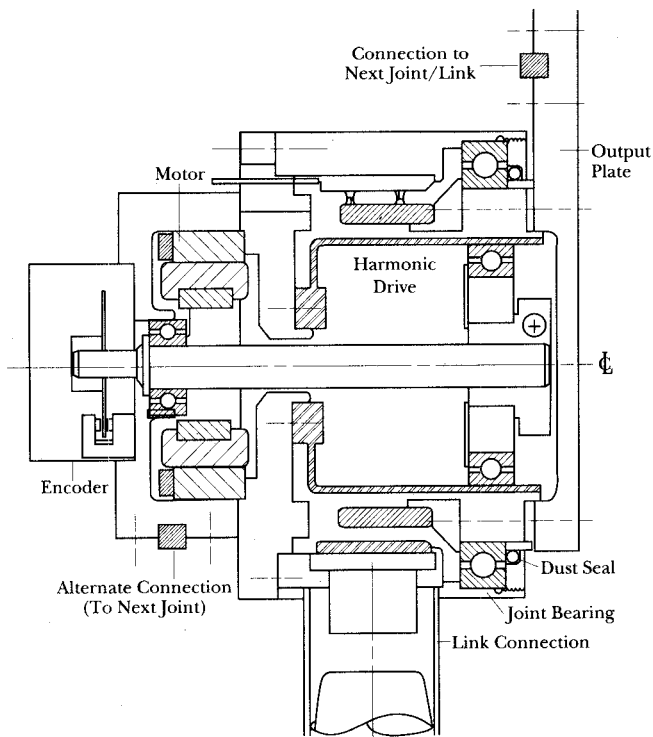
Each modular joint contains a DC motor, harmonic drive reducer and position sensor.
